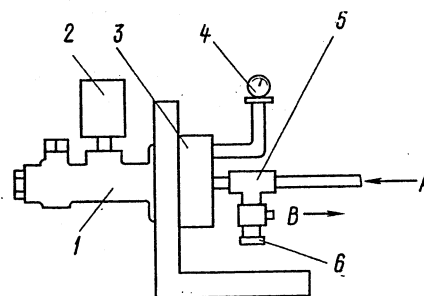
Checking the Rear Sealing Ring for Tightness:
